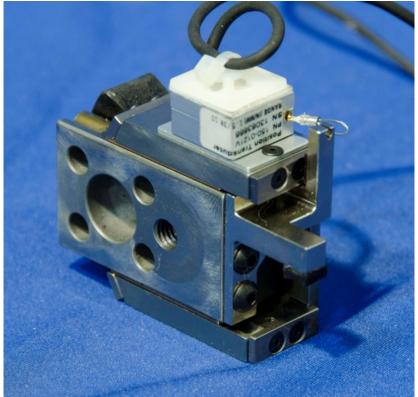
Attach string pot assembly to molded inboard knee slider
